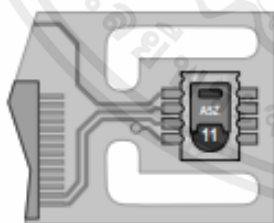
Top view of example of mounted SHT1x with slits milled into PCB to minimize heat transfer.
